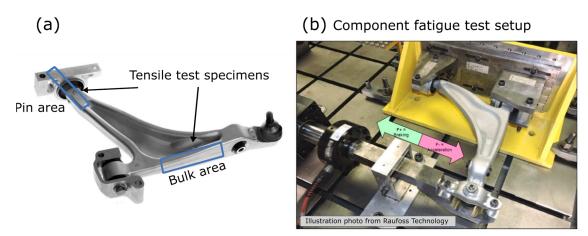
(a) Position of the tensile test specimens of the forged front lower control arm. (b) Setup for the in-house fatigue trials of fully assembled front lower control arms.
